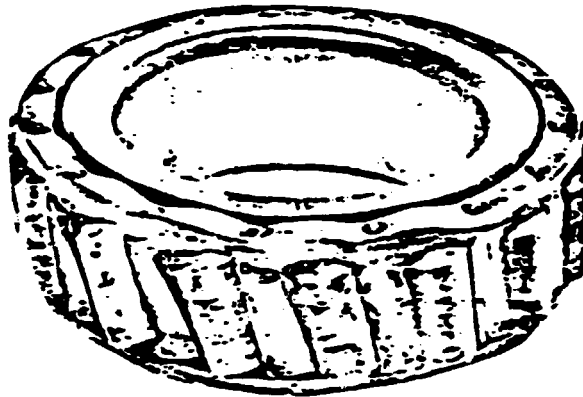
Inner ring with roller rim of a cylinder roller bearing N 2213, which was heavily damaged by axial distortions.
